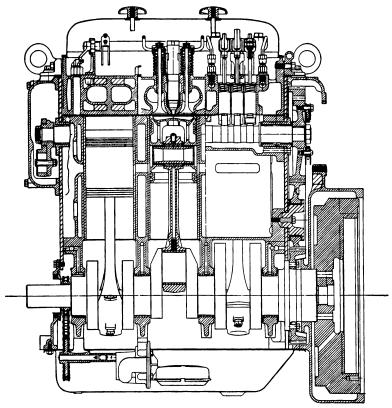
Longitudinal Cross-section of General Motors Model 3-71 2-Cycle Diesel Engine.
